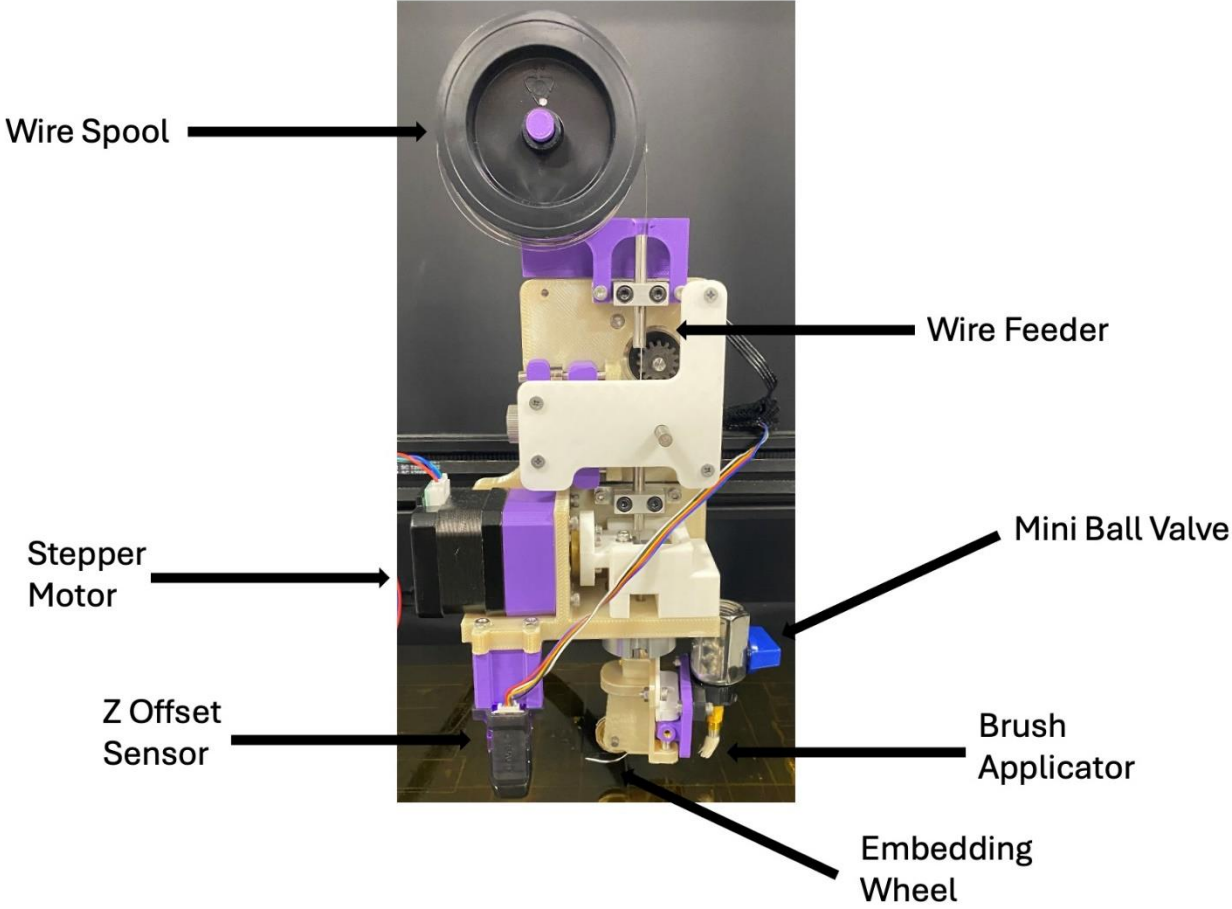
Components of the wire embedding tool developed in-house and mounted to a desktop 3D printer Solvol [8].
